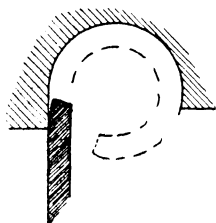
IN CURLING THE EDGE OF A KETTLE OR REFLECTOR THE DIRECTION IN WHICH THE EDGE WAS TRIMMED IS IMPORTANT
